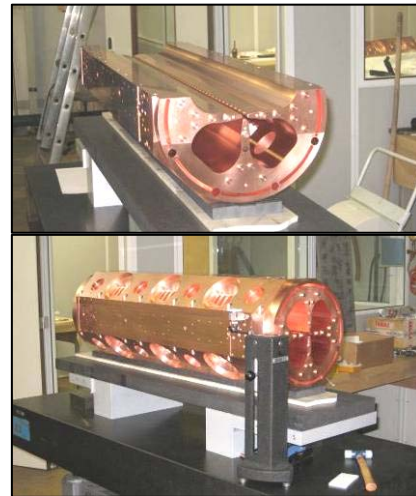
Assembly and alignment of a IPHI module before the first brazing step.
